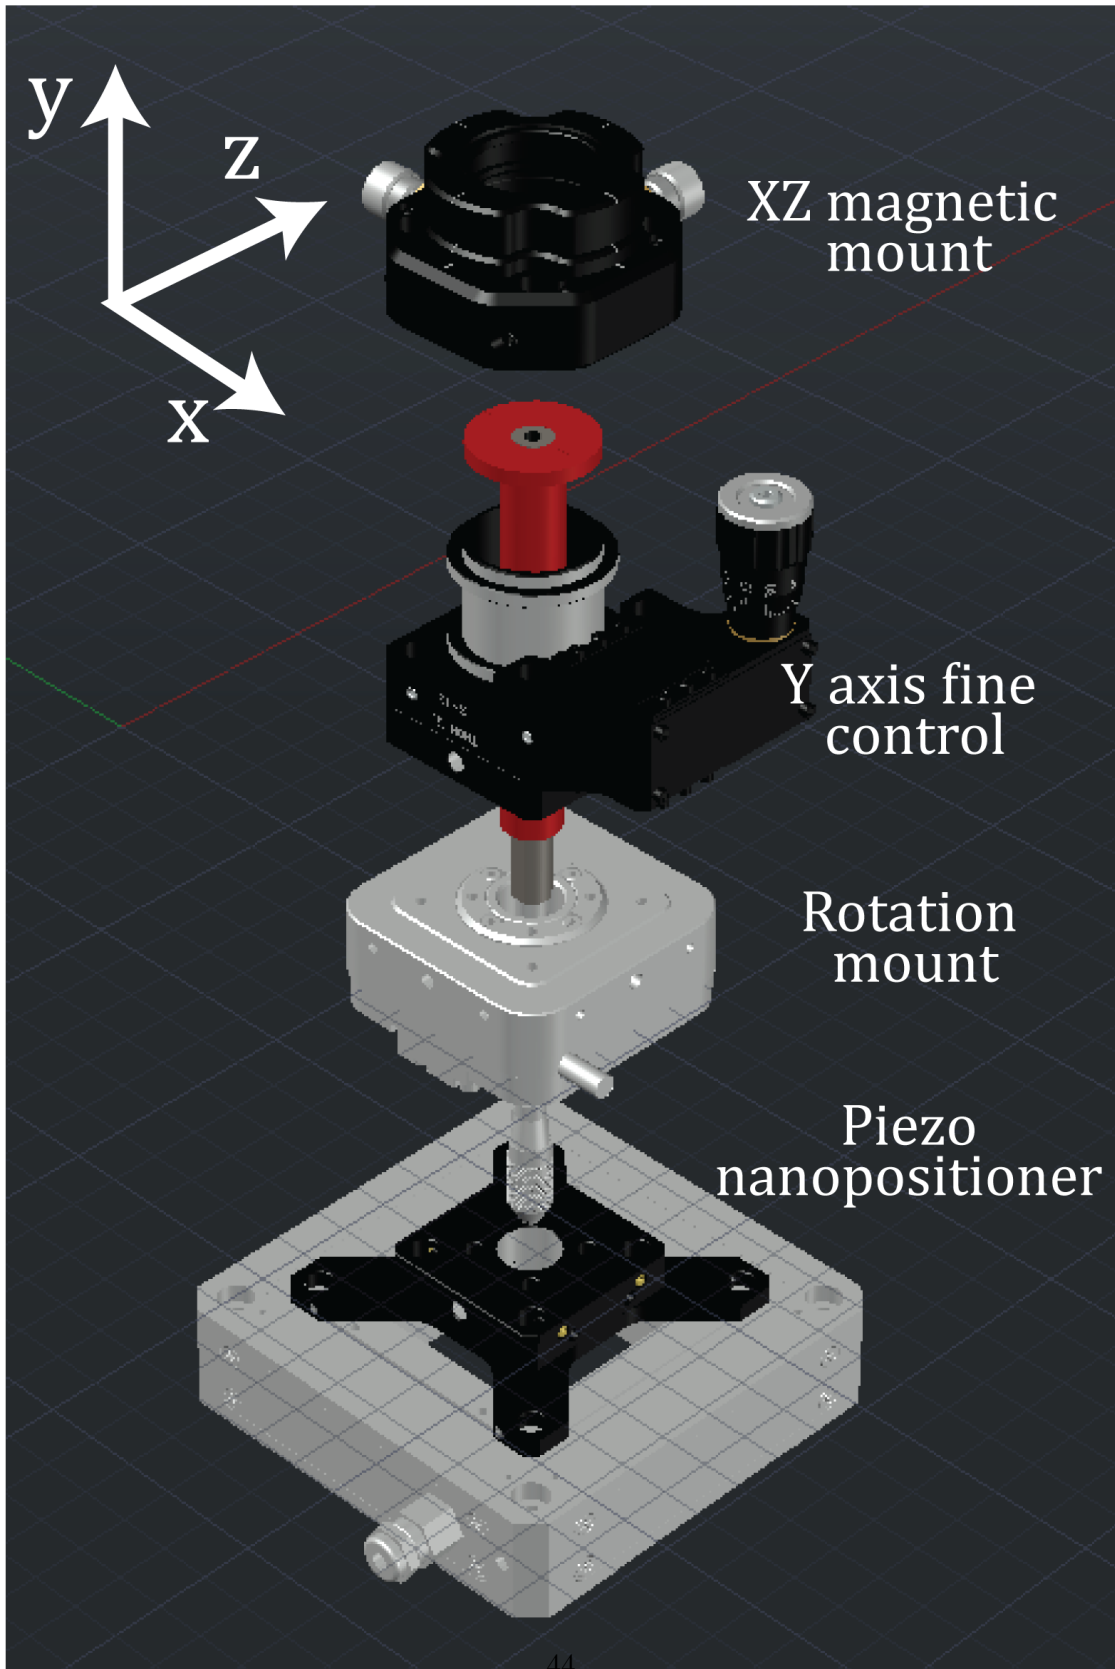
AUTOCAD rendering of the sample holder using an exploded view to show all aspects.
